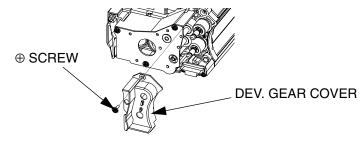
Removal of the Idler Gear (Z28) Assembly
